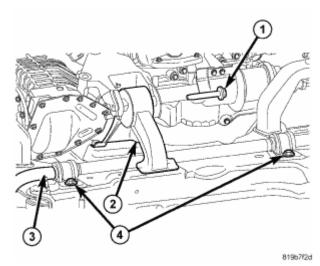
Identifying Rear Torque Mount Courtesy of CHRYSLER LLC
